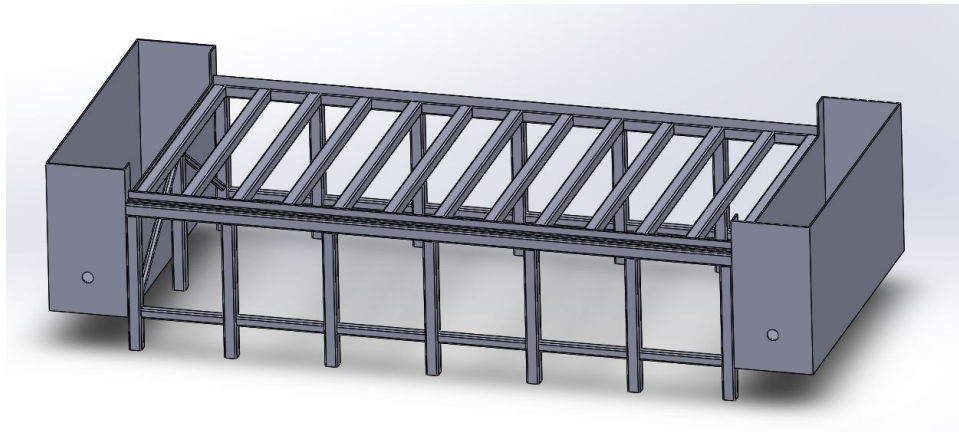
CAD Drawing of Aluminum Frame for Glass with Side Tanks
